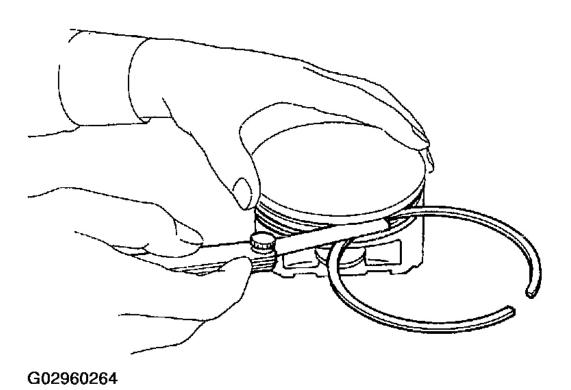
Measuring Clearance Between Piston Ring & Piston Ring Groove With Thickness Gauge
